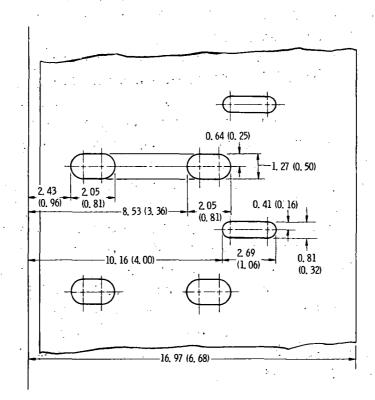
Primary-zone and diluent-zone air-entry hole pattern for final combustor design. Dimensions are in centimeters (in.).
